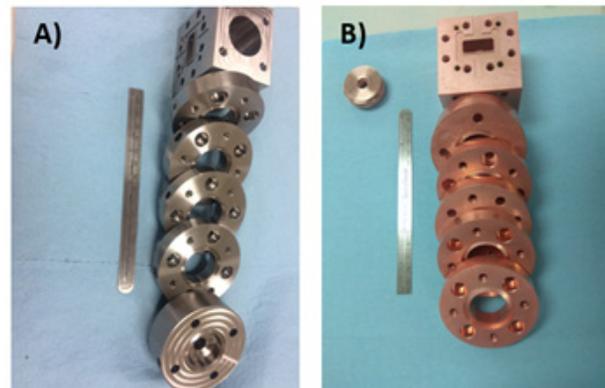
Brazeless assembly manufacturing. A) Stainless steel parts. B) Copper plated parts
